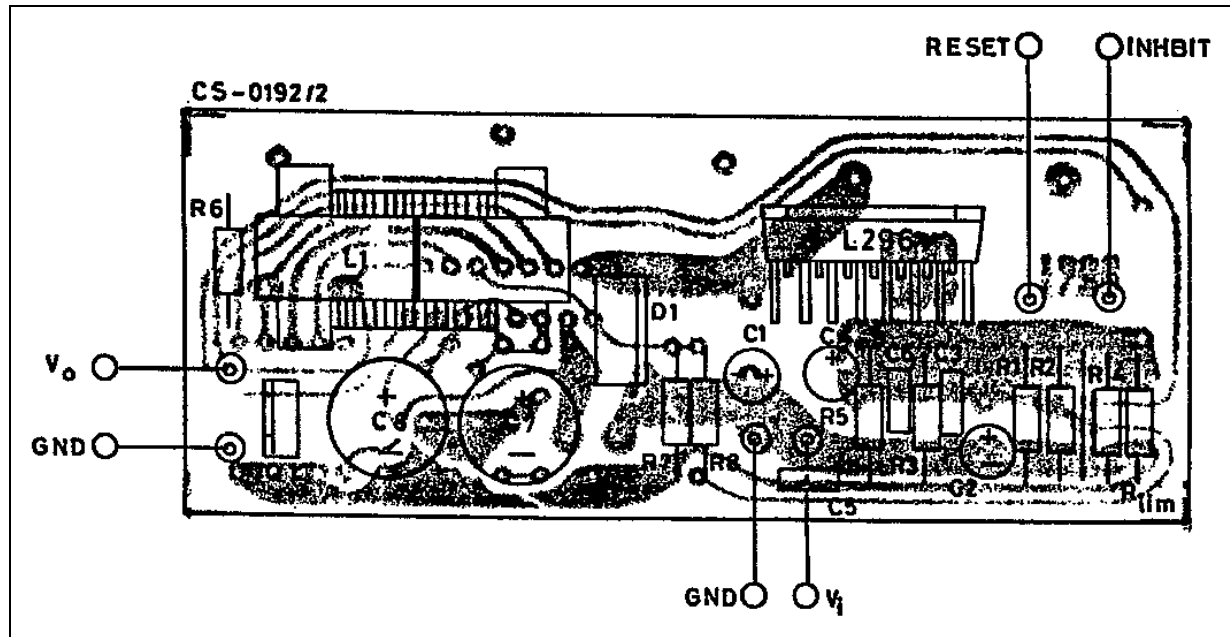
P.C. Board and Component Layout of the Circuit of fig. 34 (1:1 scale)
